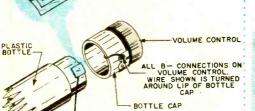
Details of mechanical assembly of pill-bottle probe shell.
